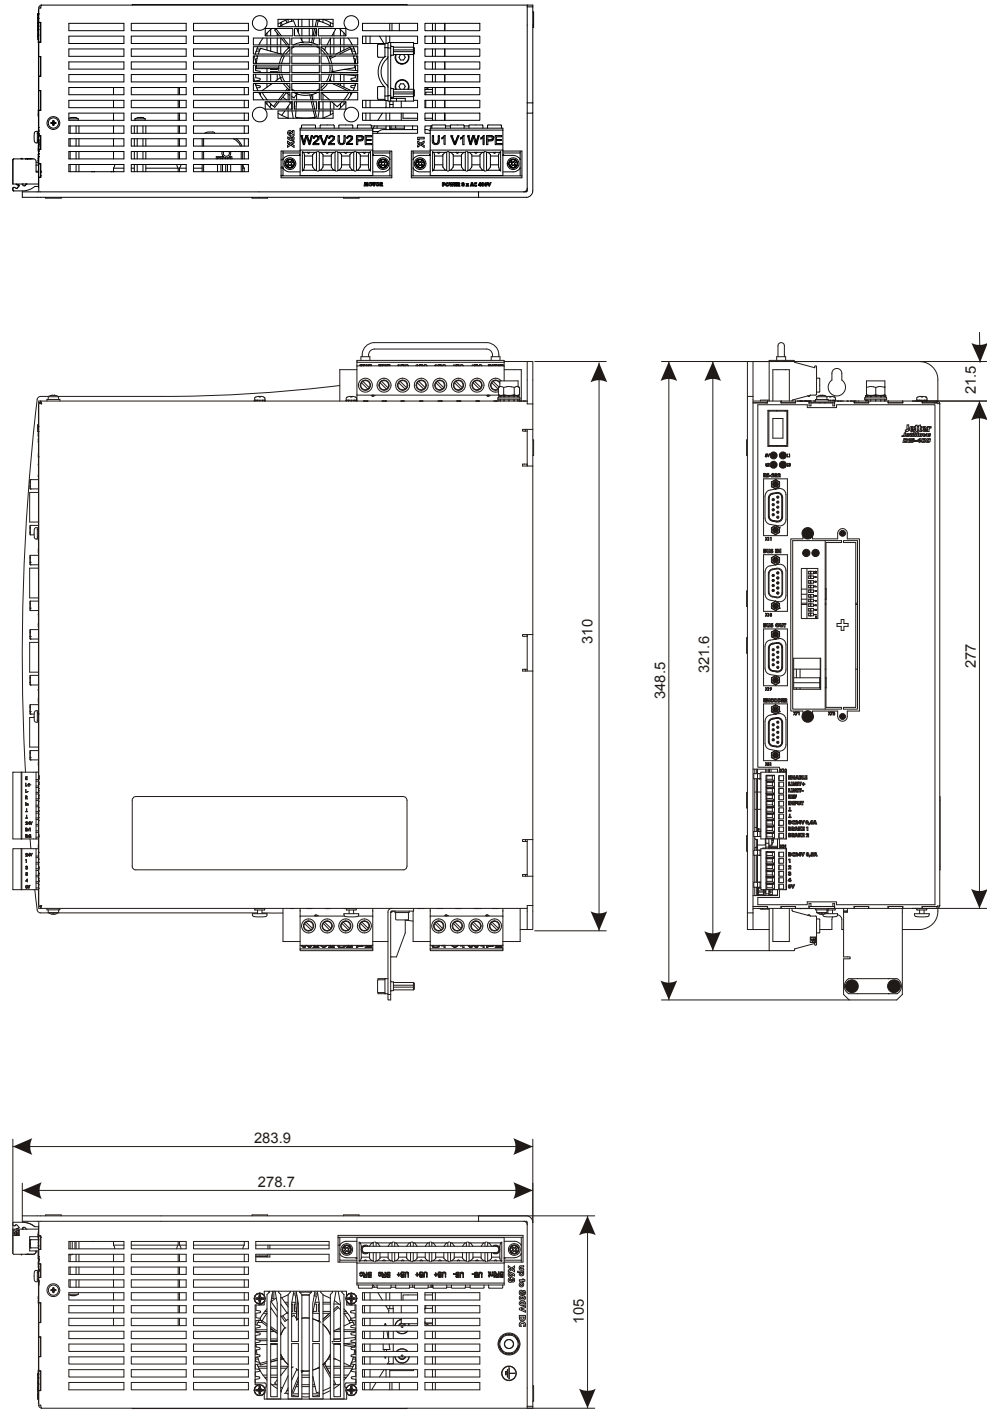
Physical dimensions of the JetMove 215B-480 (in mm)
